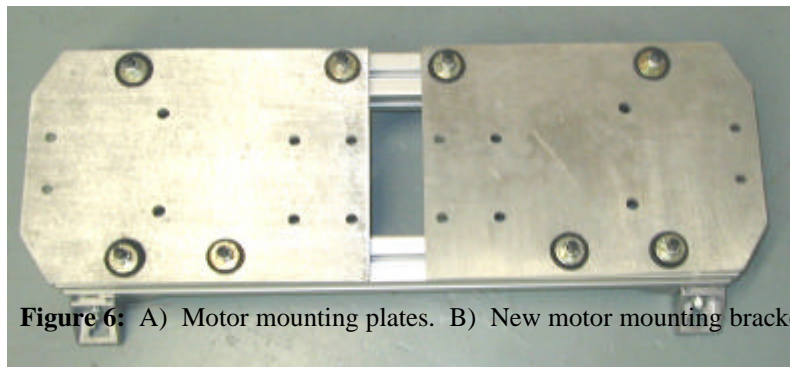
A) Motor mounting plates. B) New motor mounting bracket.
